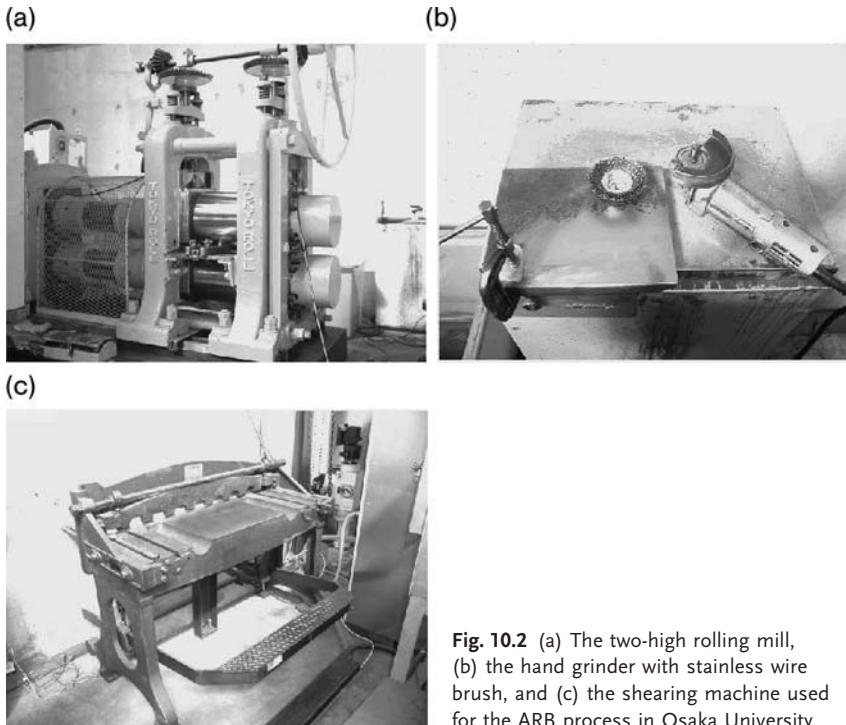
(a) The two-high rolling mill, (b) the hand grinder with stainless wire brush, and (c) the shearing machine used for the ARB process in Osaka University.
